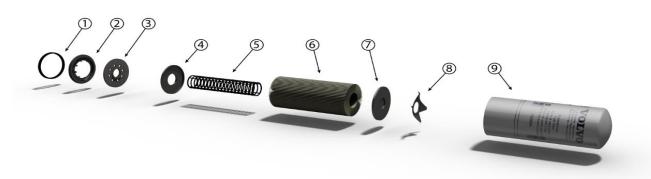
Main fuel filter, exploded view. (1) Gasket (2) Retainer sheet (3) Interface plate (4) Filter element cap (5) Inner tube (6). Filter element (7) Filter element cap (8) Bypass spring (9) Canister
